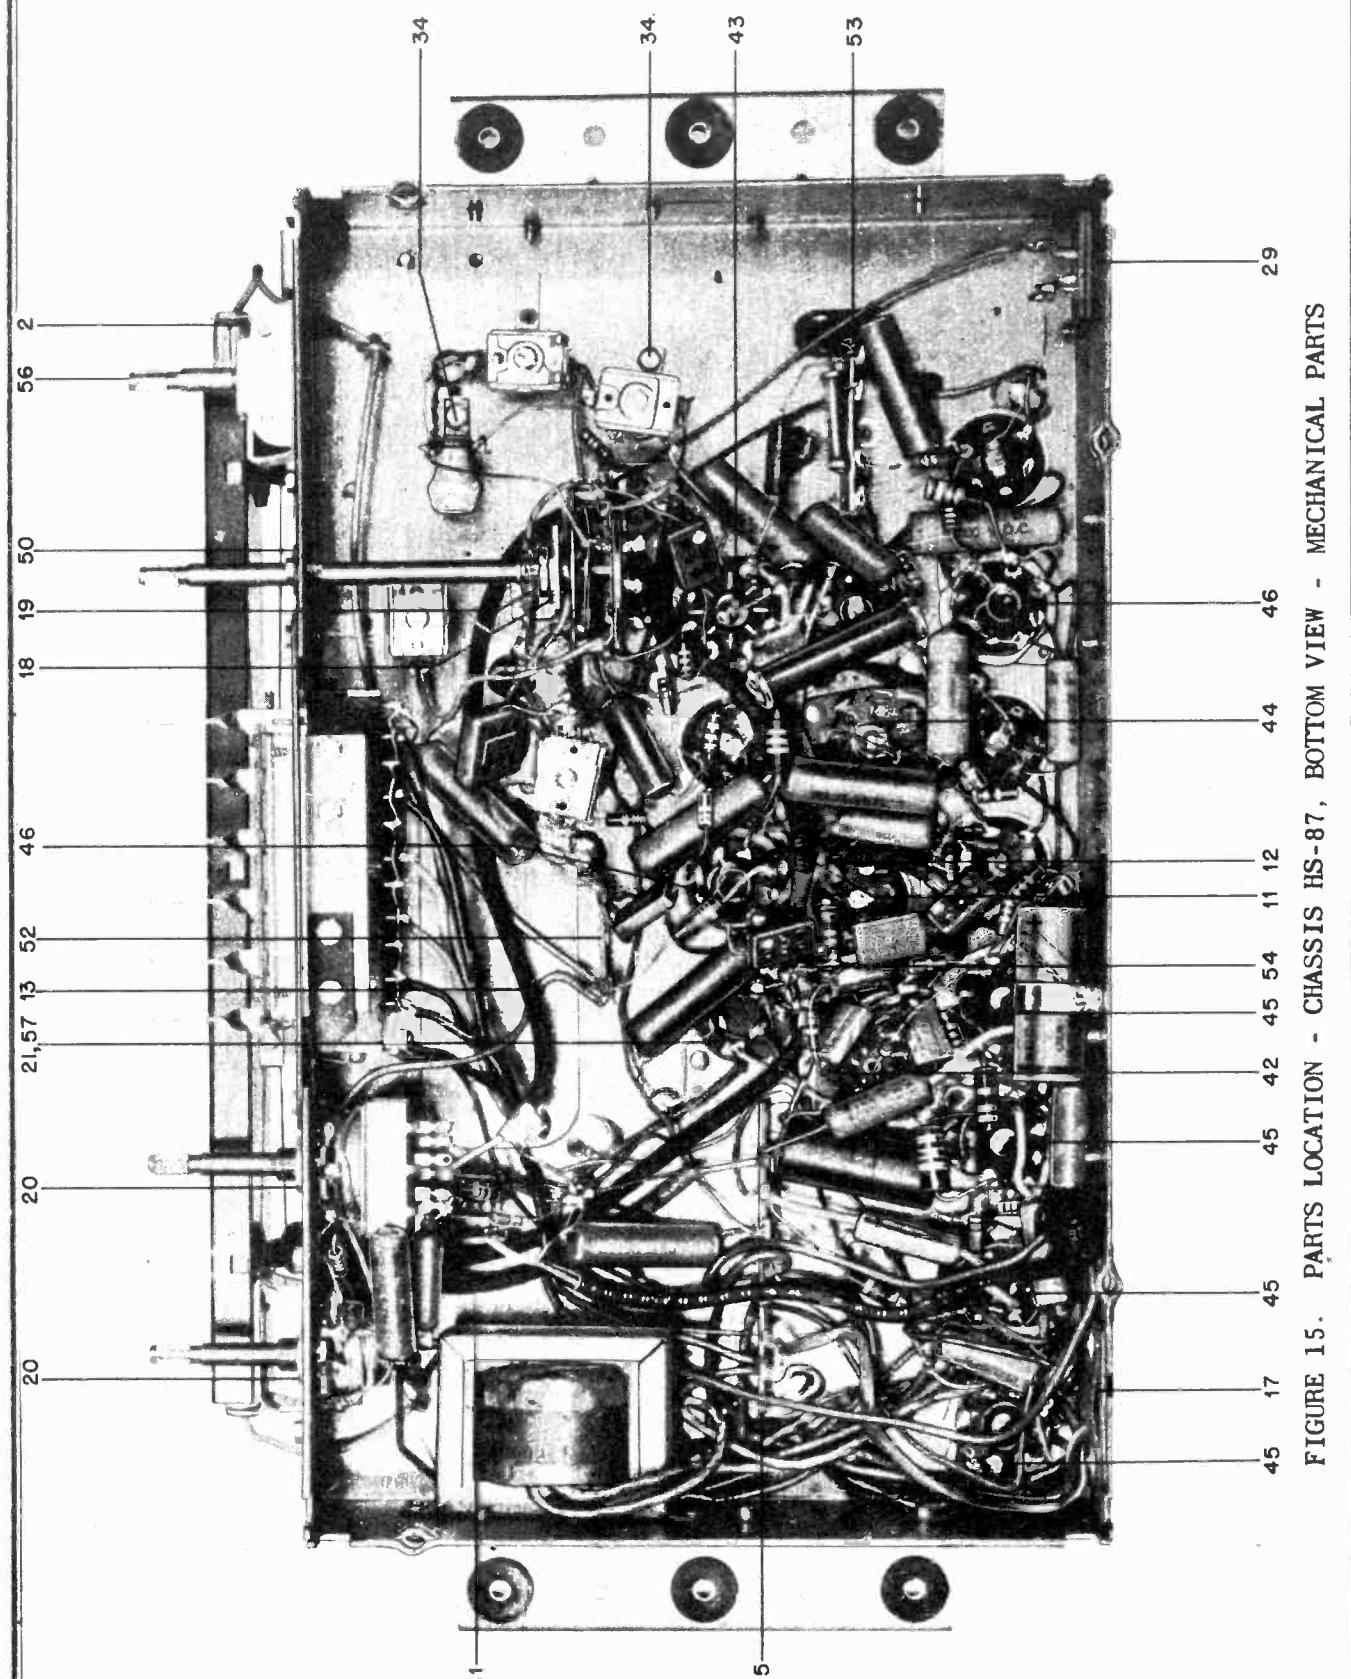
PARTS LOCATION - CHASSIS HS-87, BOTTOM VIEW - MECHANICAL PARTS
